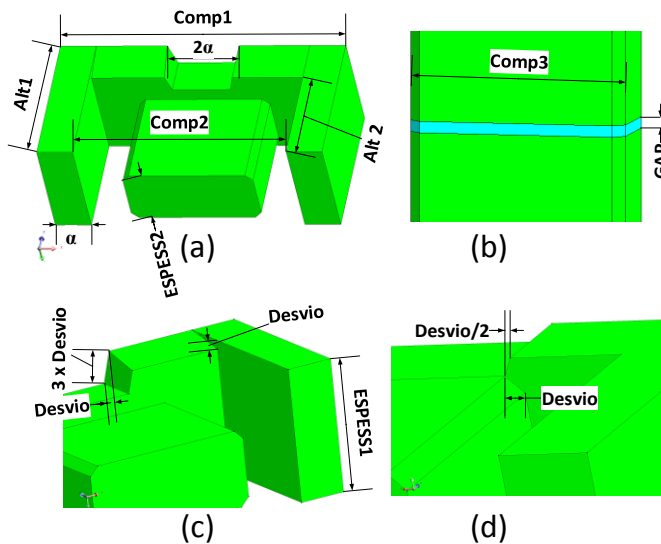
Dimensions of the EFD25 core. (a) front and down view; (b) centre arm macro; (c) Zoom in the front view; (d) Zoom in the back view
